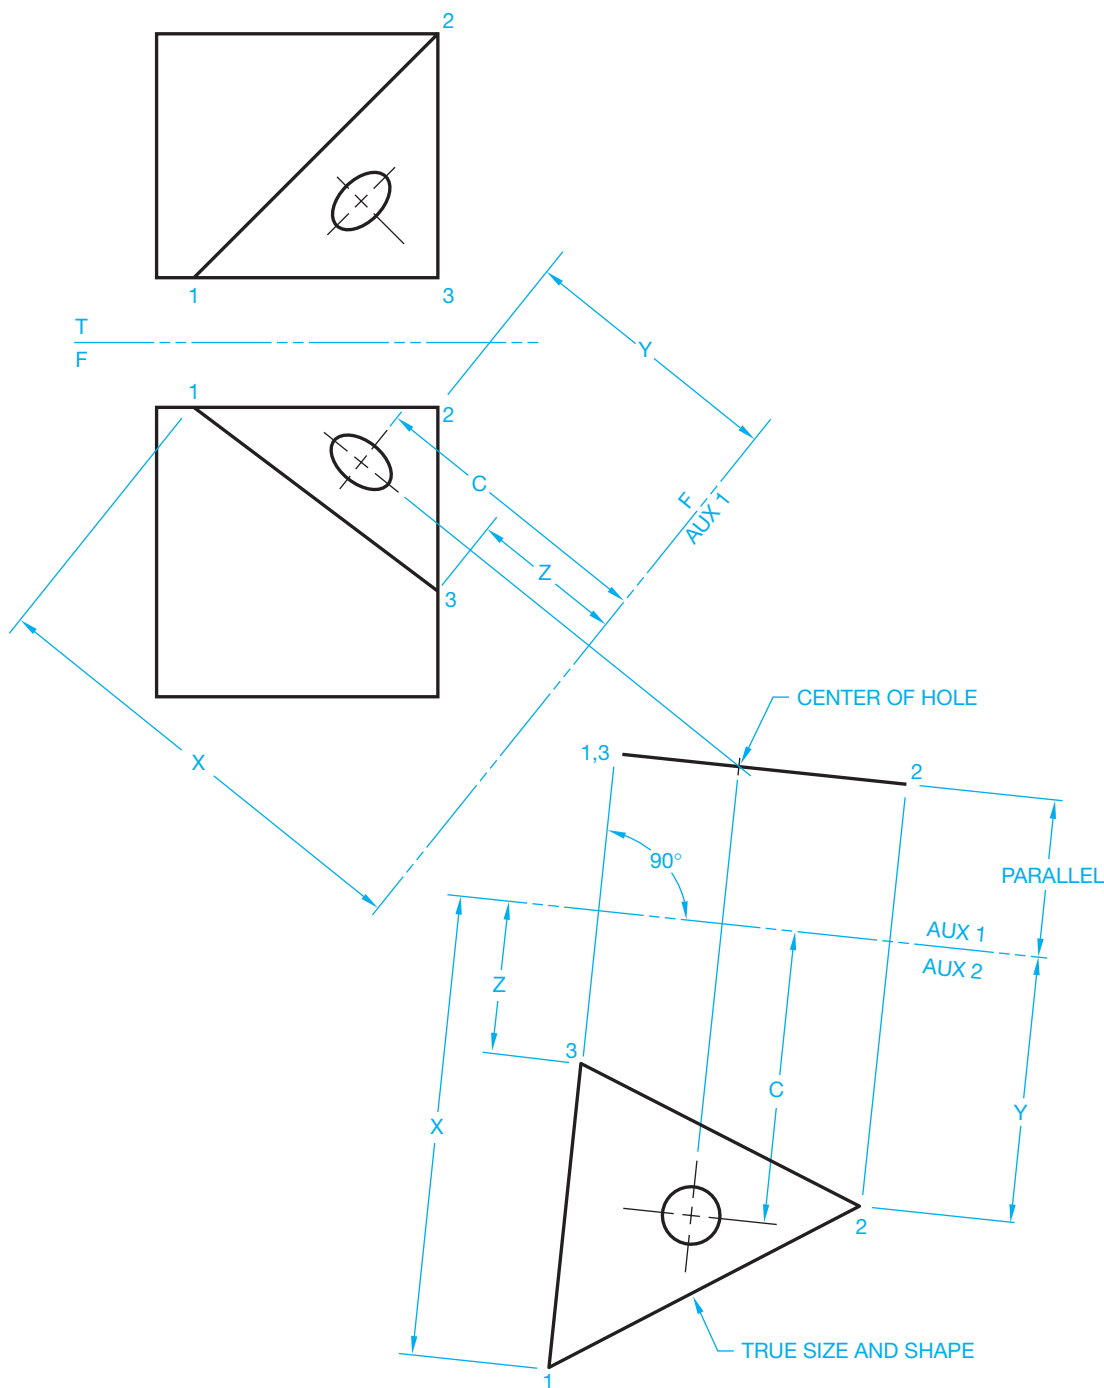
Step 3: Secondary auxiliary projected from the edge view to get the true size and shape of the oblique surface.
